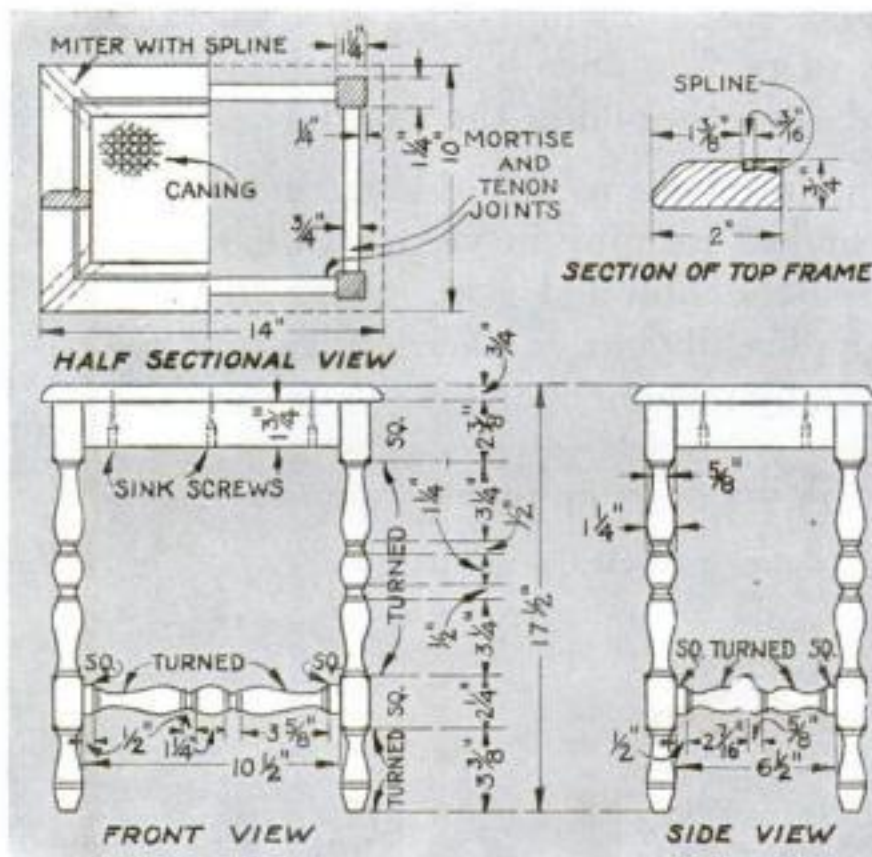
Assembly views of the telephone stool and a cross section of the top frame showing how the caning is held in place with a spline.
